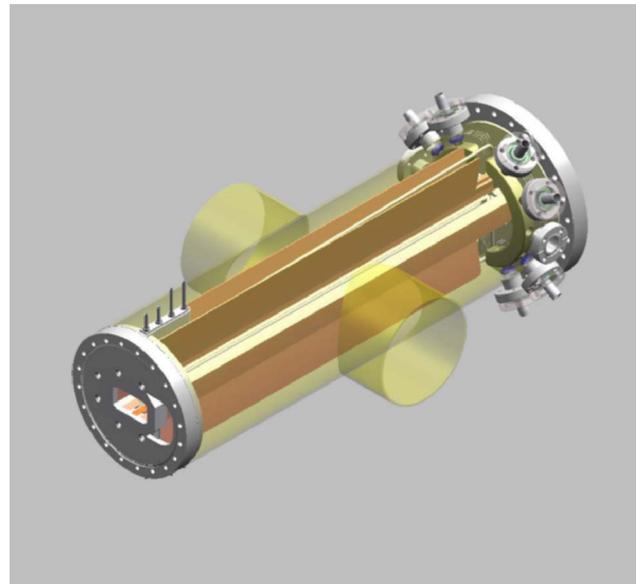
Assembly drawing of kicker. Note that enclosing stainless steel cylinder is transparent in this drawing.
